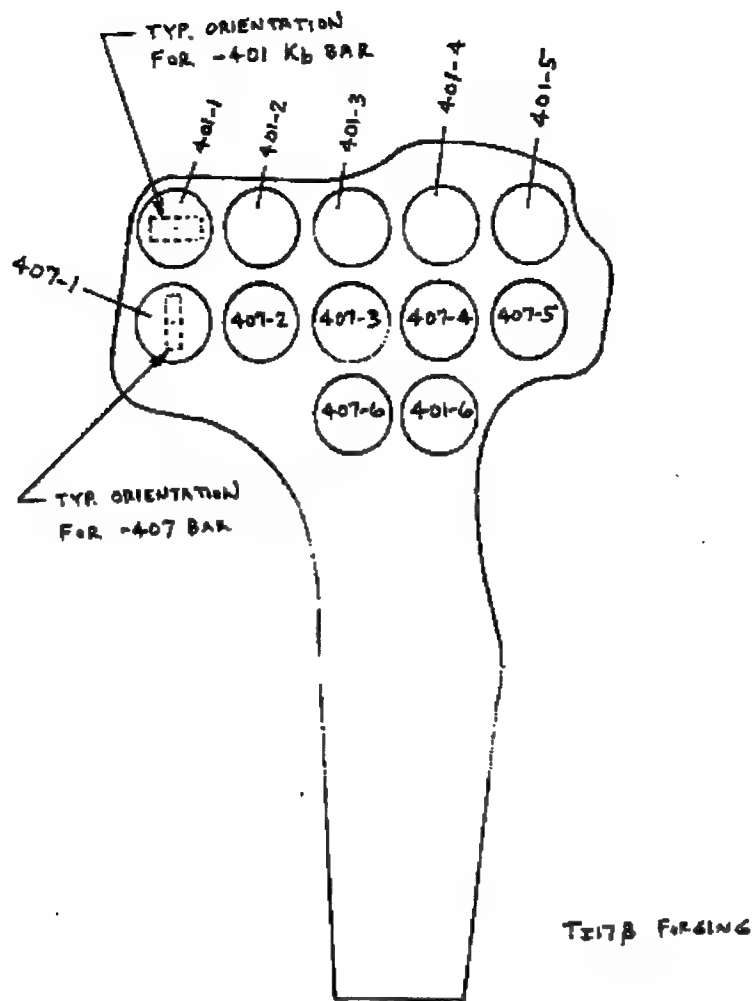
Ti-17 SPECIMEN CUTUP PLAN
